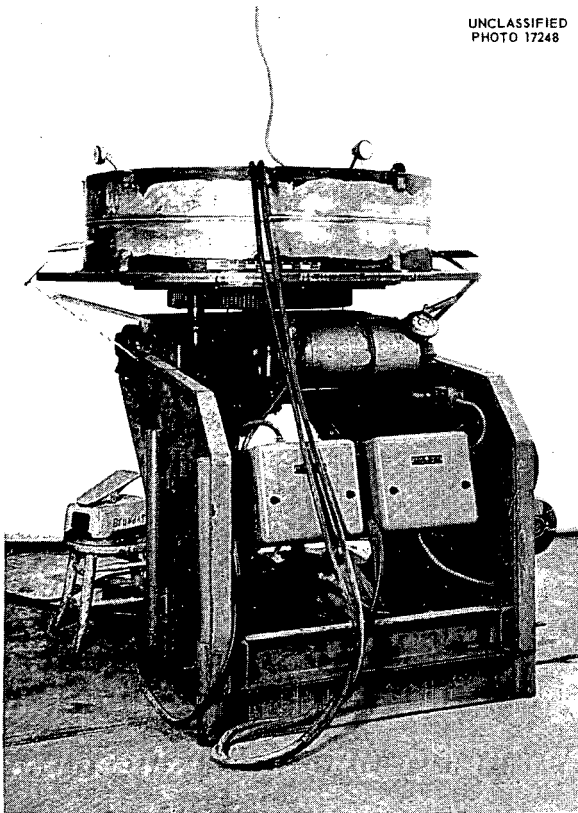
Weld-Shrinkage Hoop Test on Welding Positioners, Illustrating Dial-Gage Locations.
